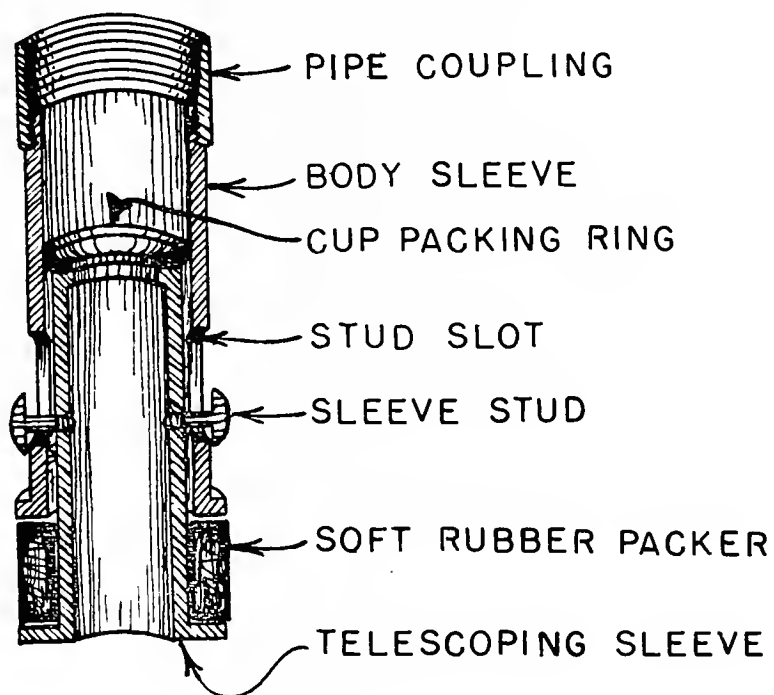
Detail of Packer Assembly for Use in Connection with a Short Liner Pipe.
